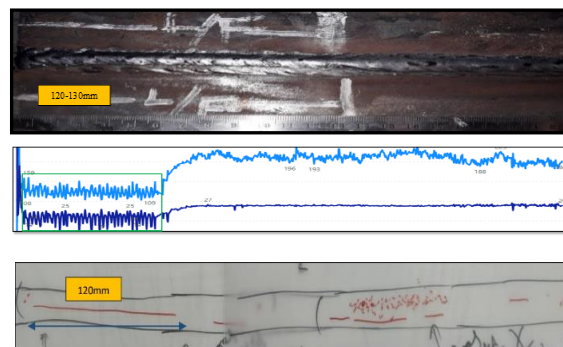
Defected weld signature of porosity & lack of fusion
